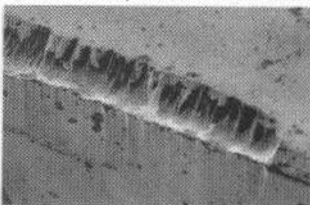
Tool wear when turning hardened AISI E52100 bearing steel.
